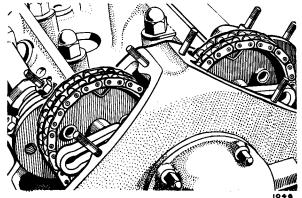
Showing the camshaft sprockets disconnected from the camshafts.
